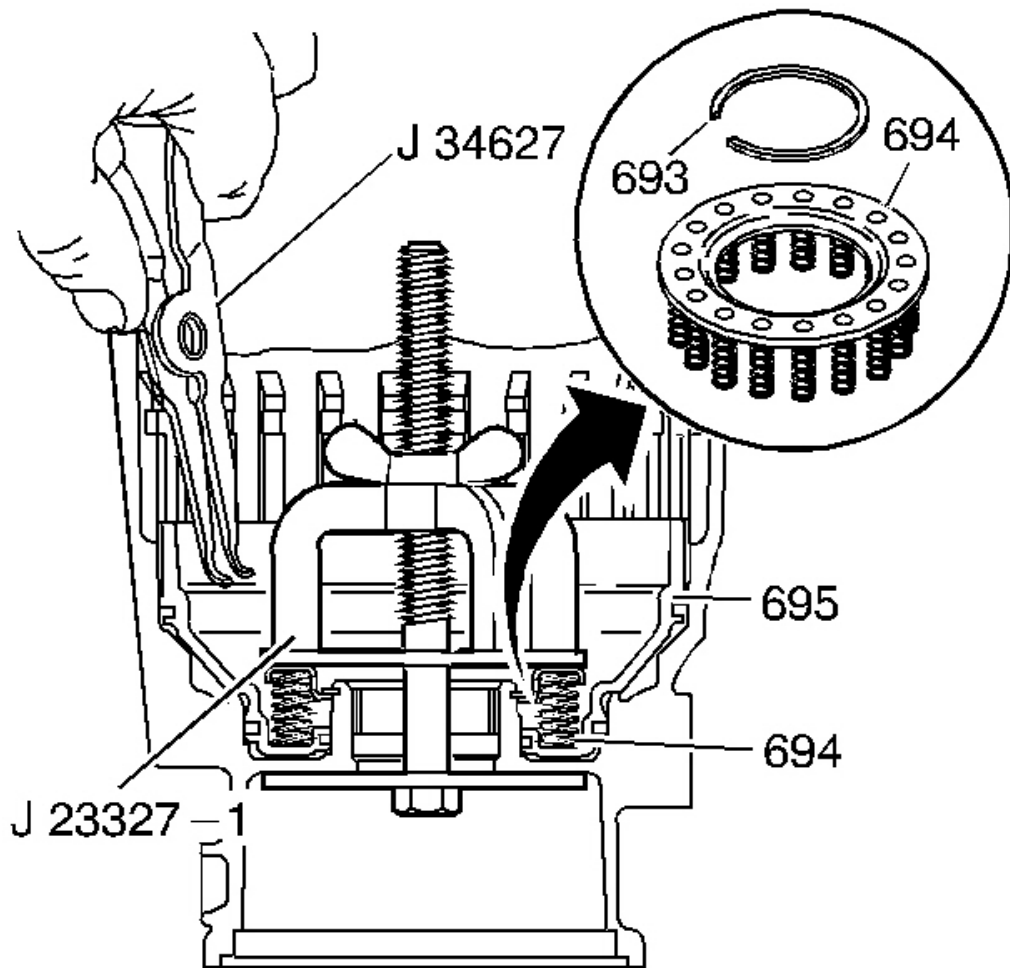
View Of Low And Reverse Clutch Spring Assembly & Retainer Ring
